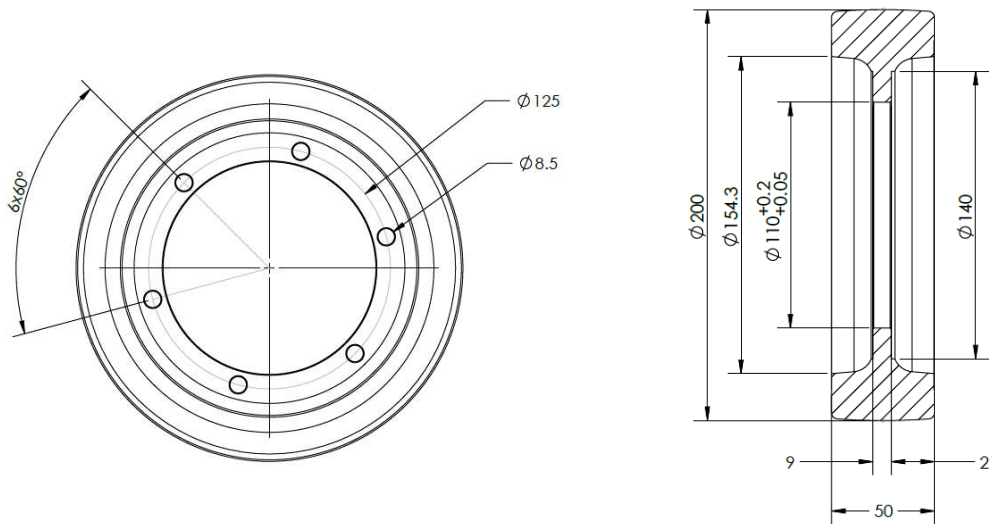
Dimensions – wheel WH01-200MM050NDI00
